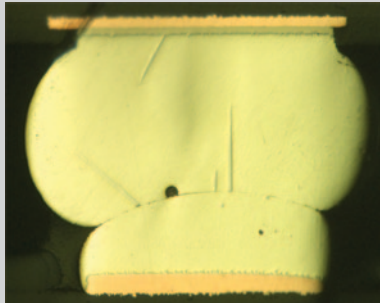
Optical cross-section of head-in-pillow SMT non-wet defect.
